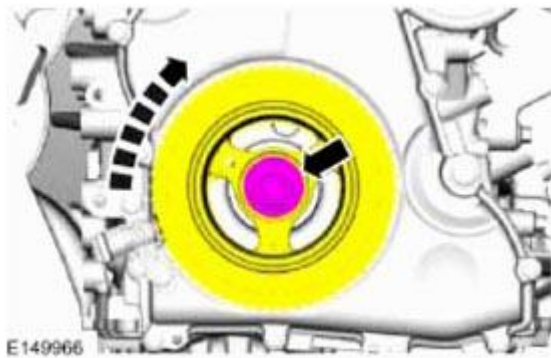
Turning Crankshaft Clockwise Until Fuel Injection Pump Cam Lobe Is At BDC
